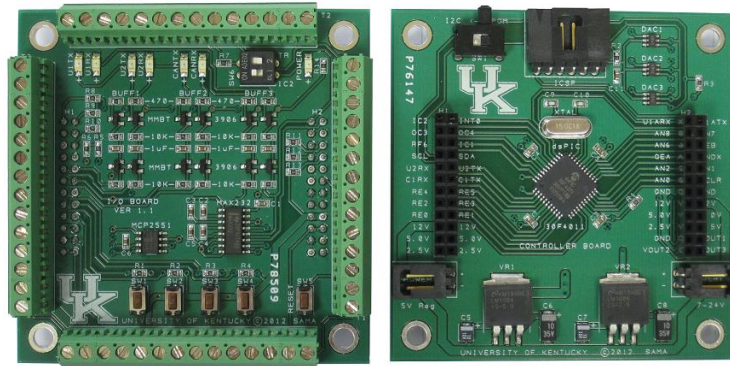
Signal Timing Device (Left: Top PCB, Right: Bottom PCB)
